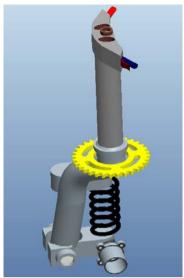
PRO-E Model of the Handle Bar Steering
